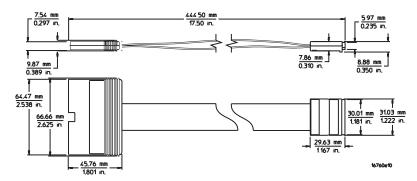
E5378A 100-pin single-ended probe dimensions
